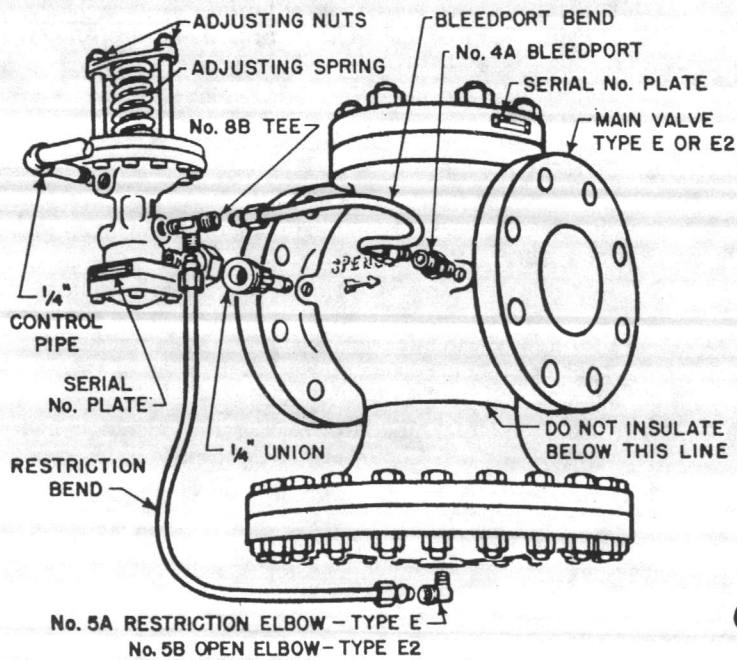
Regulator Assembly for Type E or E2 Main Valves
